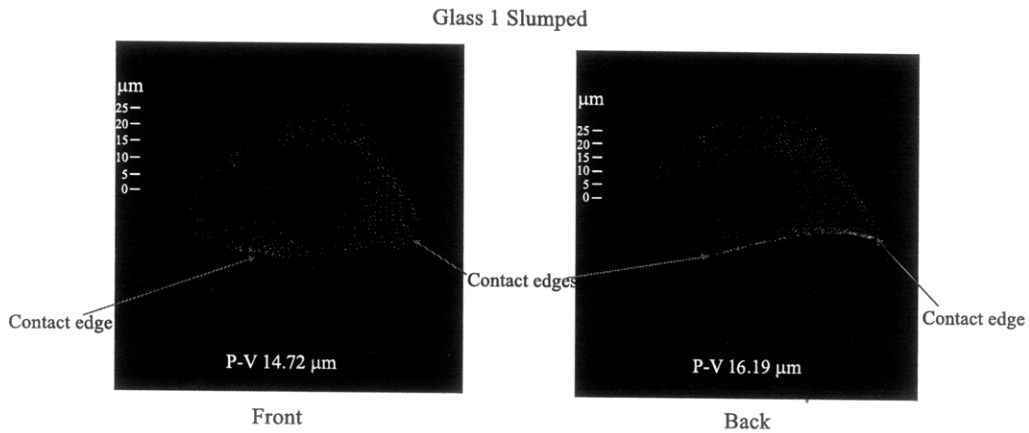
(Left) Front surface of slumped Glass 1. (Right) Back surface of slumped Glass 1. When flipping the glass sheet from front to back, the right edge in the front picture becomes the left edge in the back picture; however, the top and bottom edges of the glass remain unchanged.
